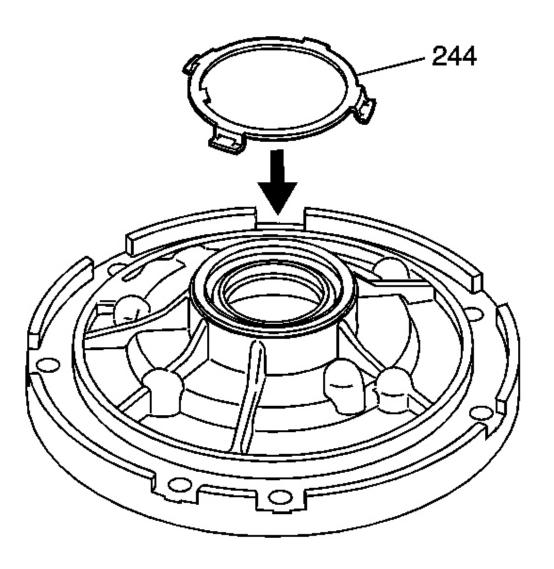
View Of Fluid Seal Retainer Courtesy of GENERAL MOTORS CORP.
